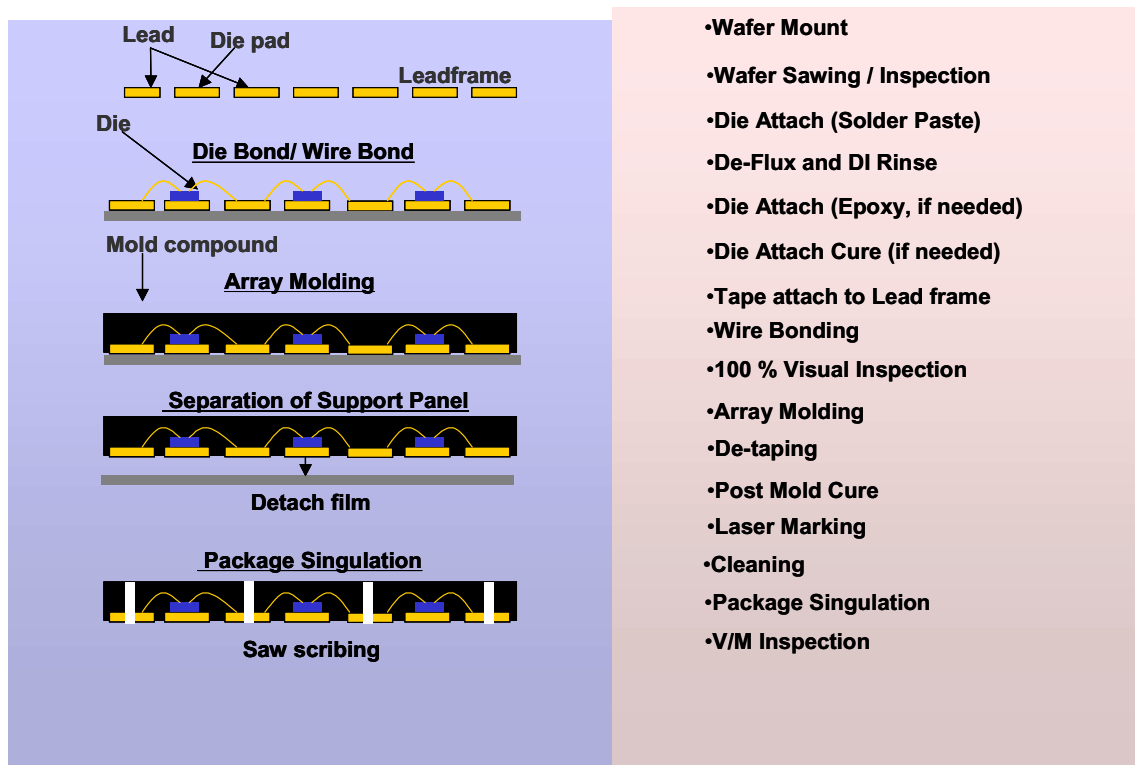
Mold Array Packaging Process Flow for the PQFN Package
